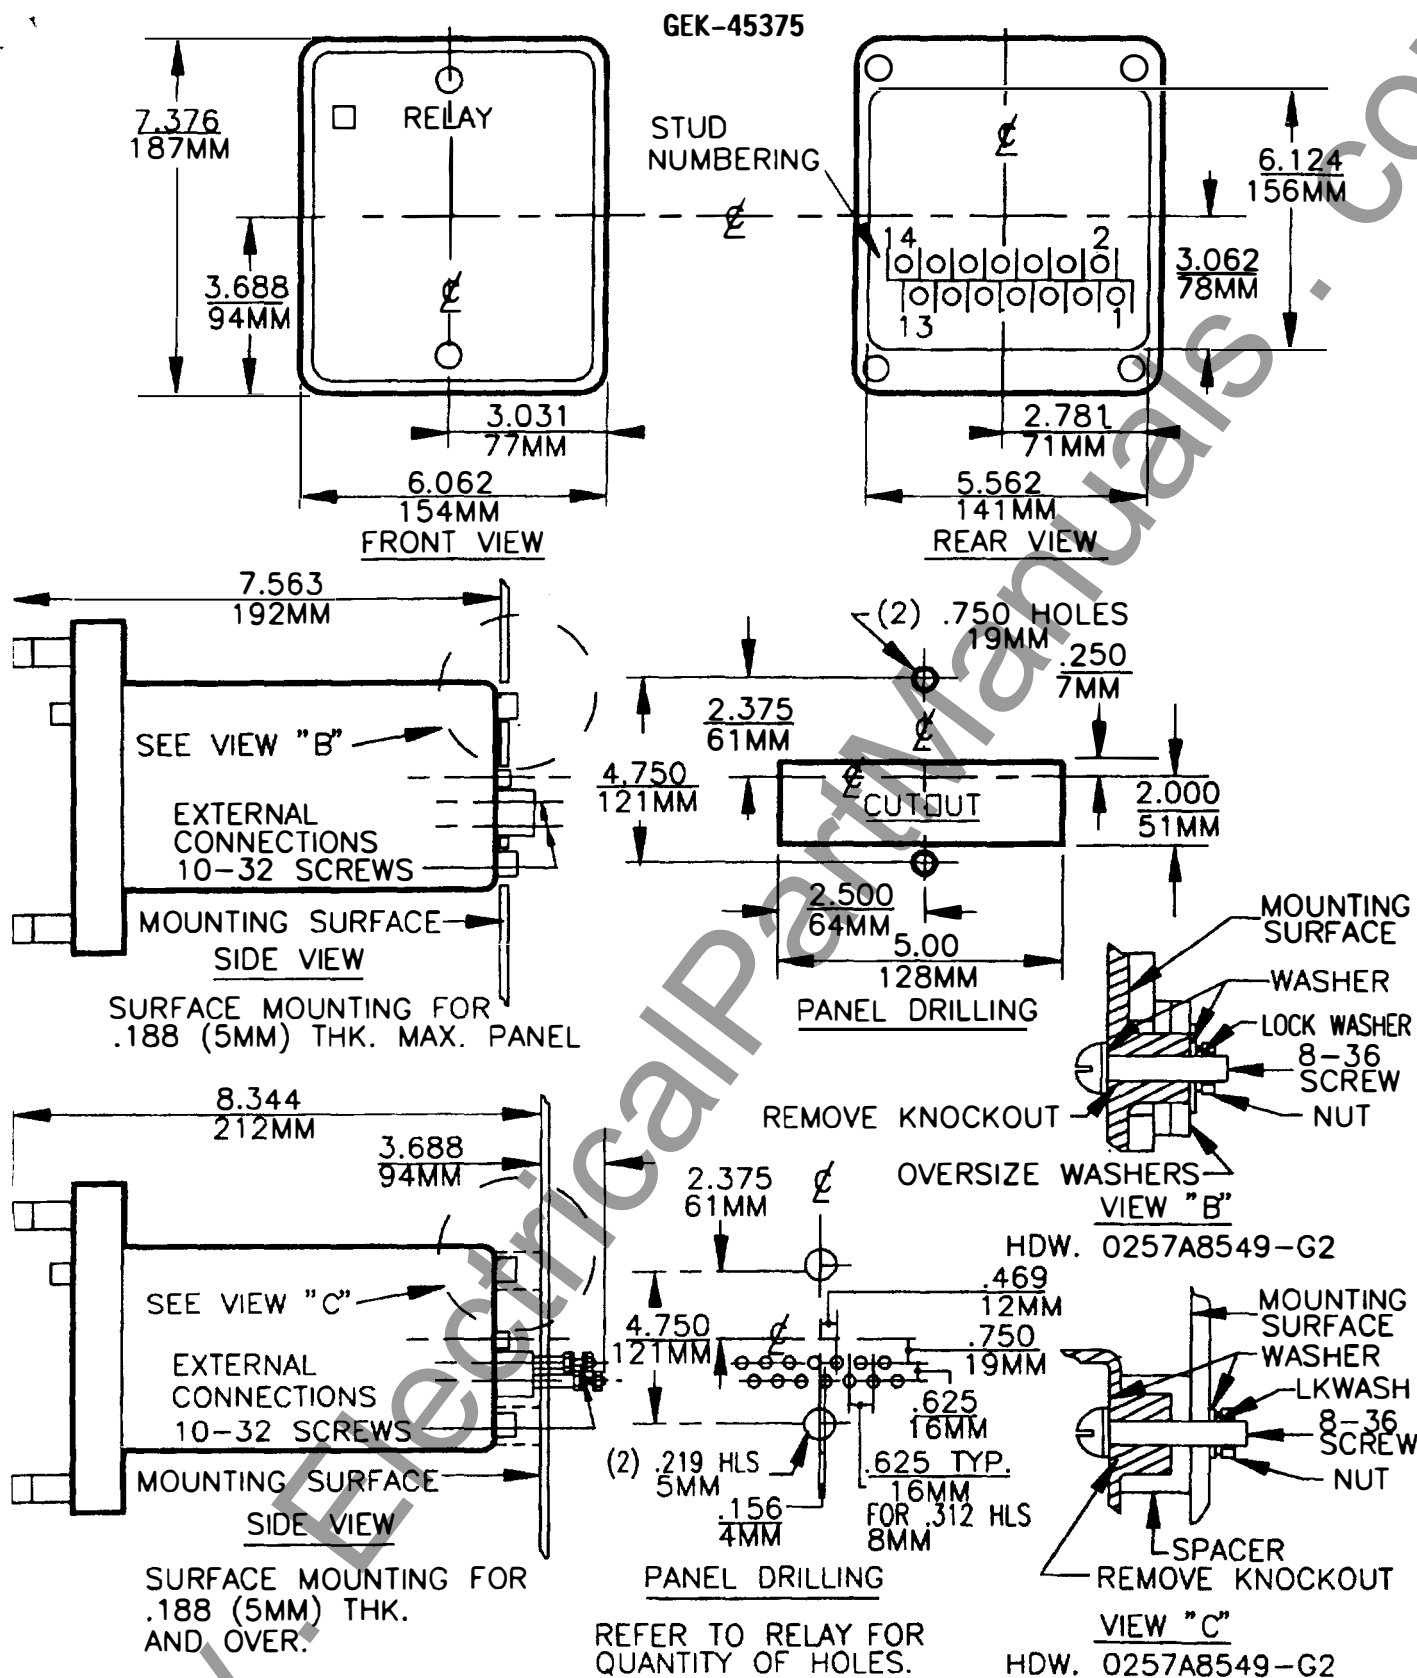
(0257A8452 Sheet 2 [6]) Outline & Panel Drilling for Surface Mounting of Relay Types IFC51, IFC53 and IFC77
